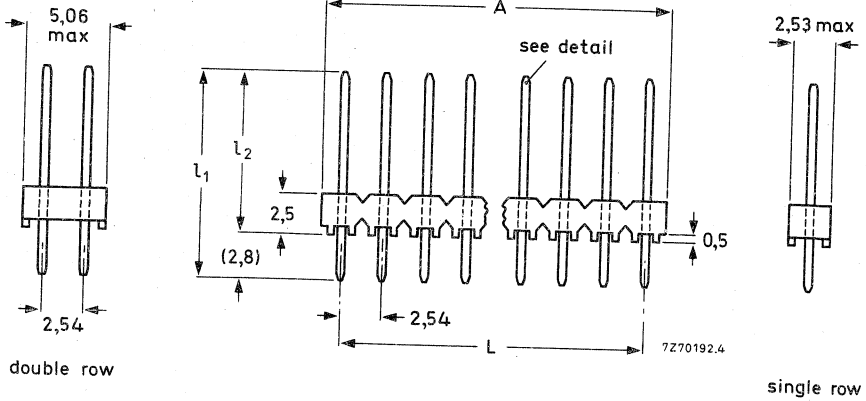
Male header with straight pins. See Table 3 for dimensions A and L.
